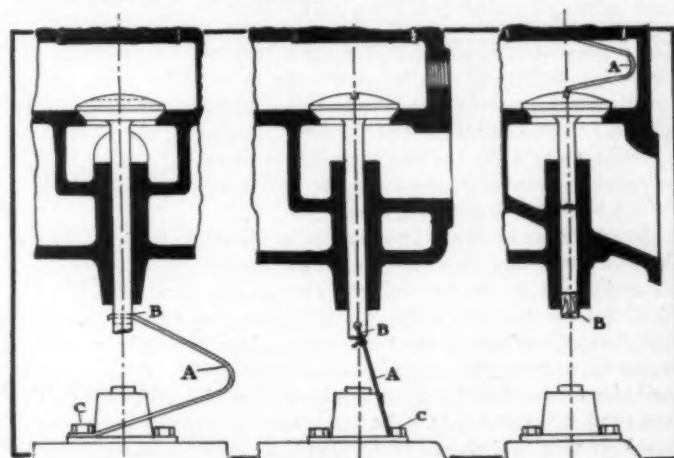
Flat spring repair Fig. 2—Elastic band repair Fig. 3—Spring in the valve chamber
